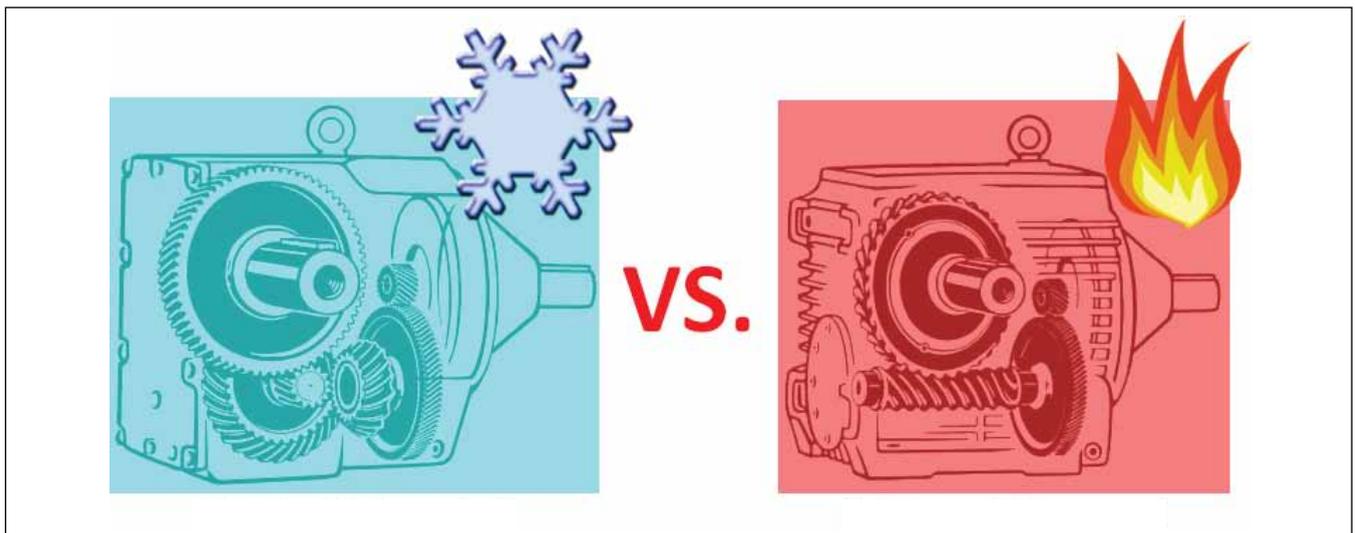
Helical-bevel rolling contact versus helical-worm sliding contact.
